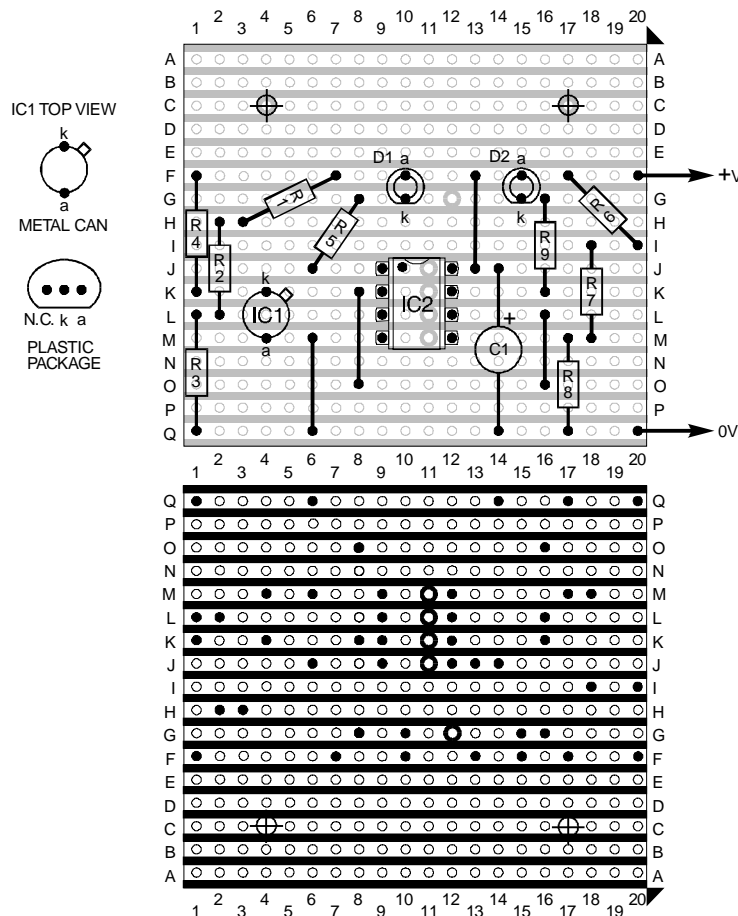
Stripboard topside component layout and details of breaks required in the copper tracks.
